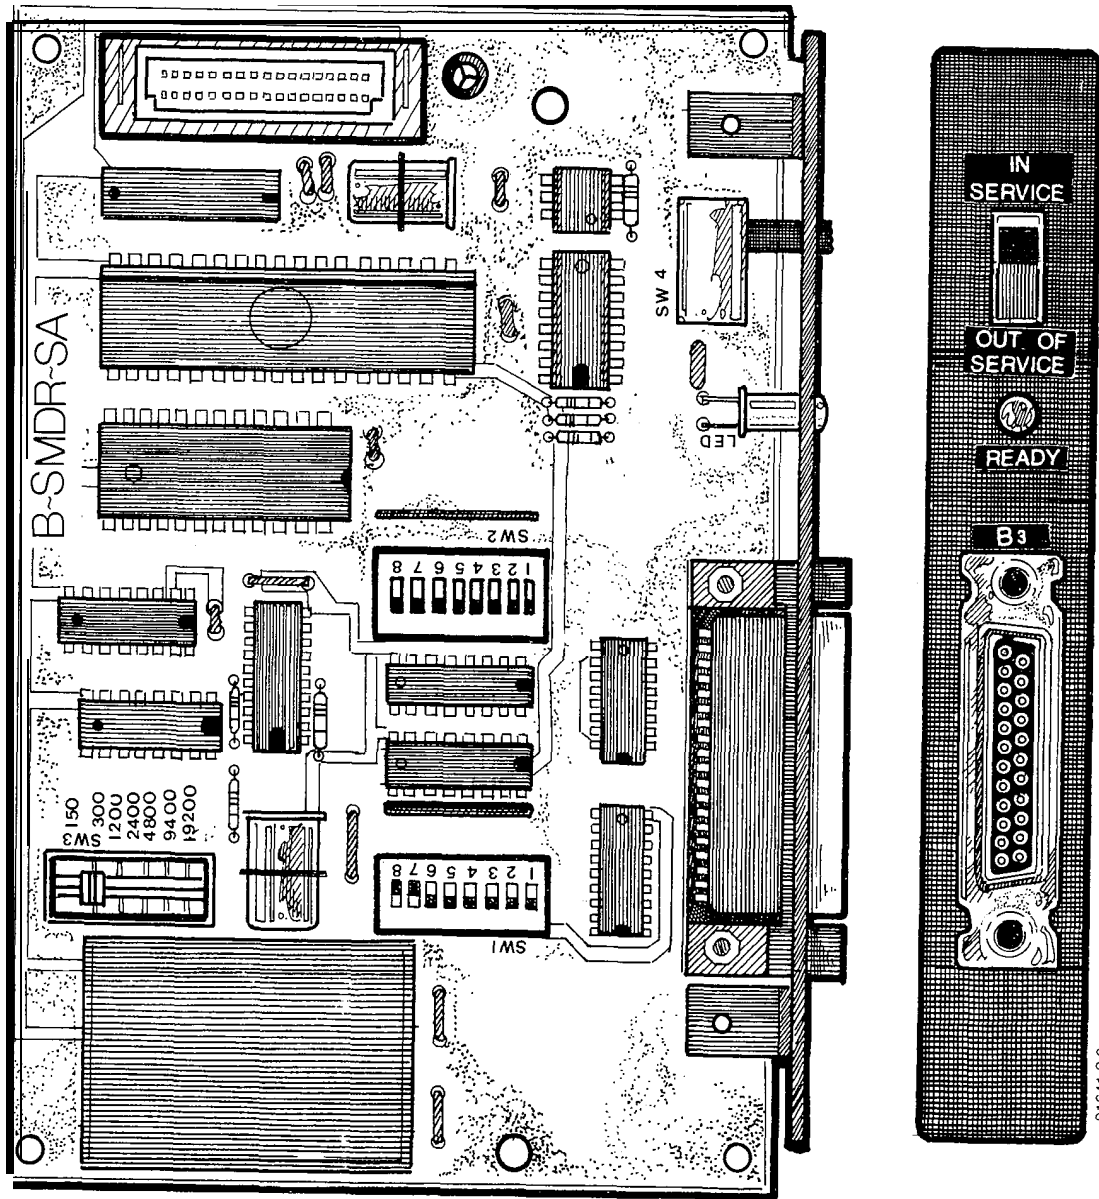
B-SMDR-SA PCB ASSEMBLY
